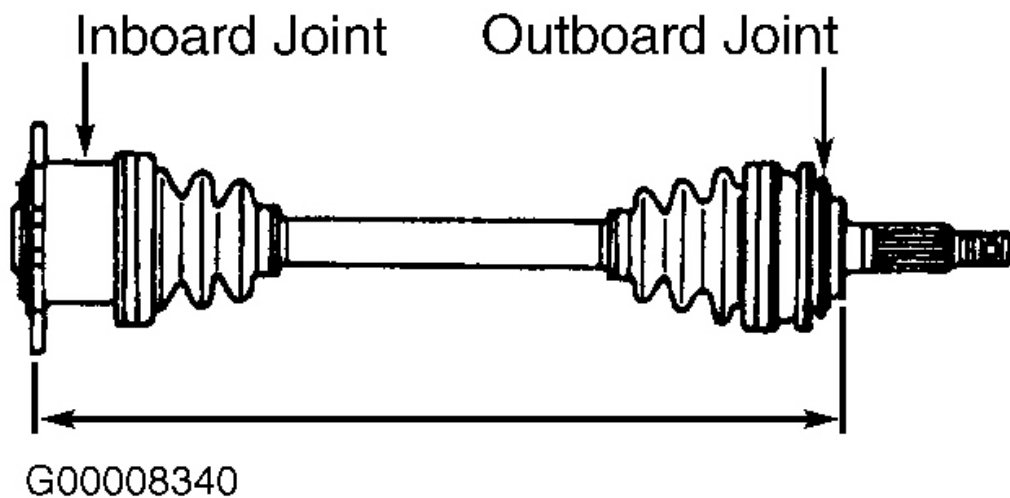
Showing Standard Length Measurement Of Rear Drive Axle
